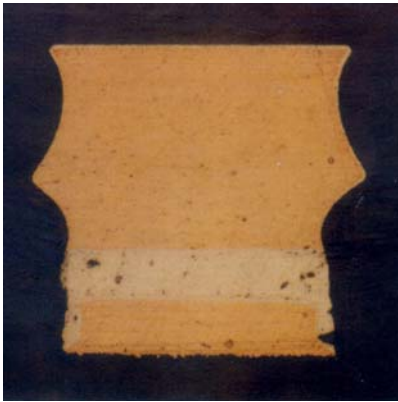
Good Solder Joint. SnPb Lead Finish, SnAgCu Solder Paste, OSP Board.
